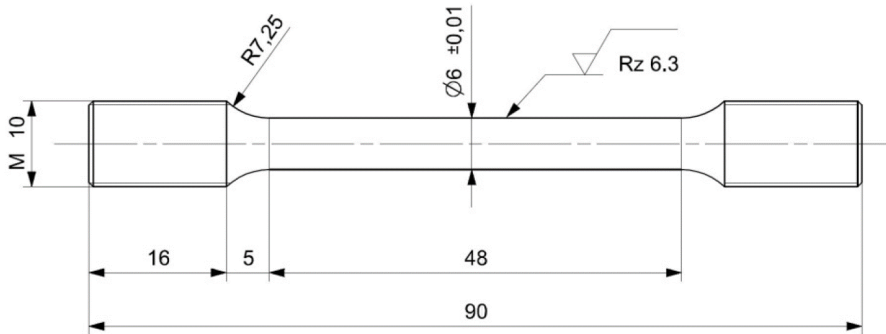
Drawing of the quasi-static tensile test specimen according to [13]
